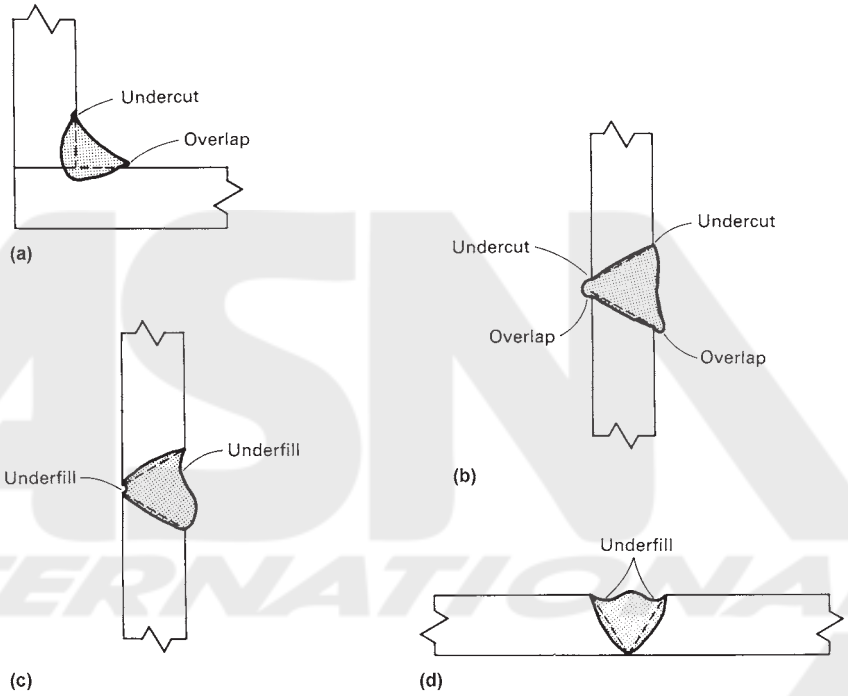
Weld discontinuities affecting weld shape and contour. (a) Undercut and overlapping in a fillet weld. (b) Undercut and overlapping in a groove weld. (c) and (d) Underfill in groove welds. Source: Ref 1
